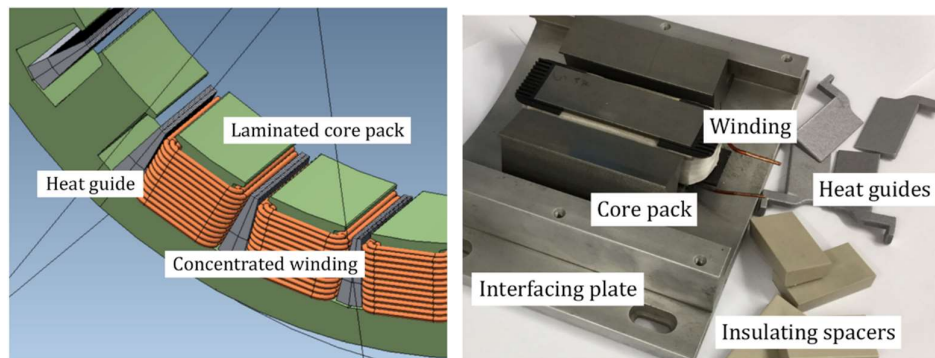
AM heat guide a. 3D CAD assembly b. Prototype motorette [13]
